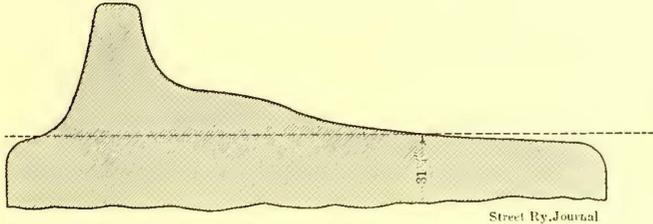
STANDARD WHEEL SECTION, NUREMBERG
